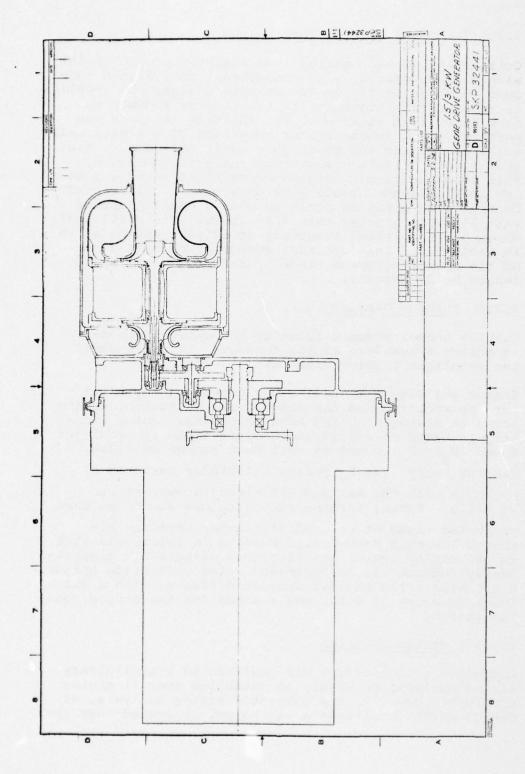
1.5/3 kW Gear Drive Generator (Drawing No. SKP32441).
